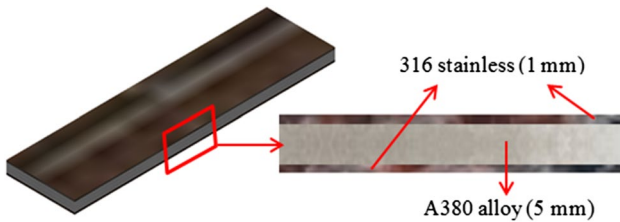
Layout of A380 alloy workpiece and 316 stainless sheet metals
